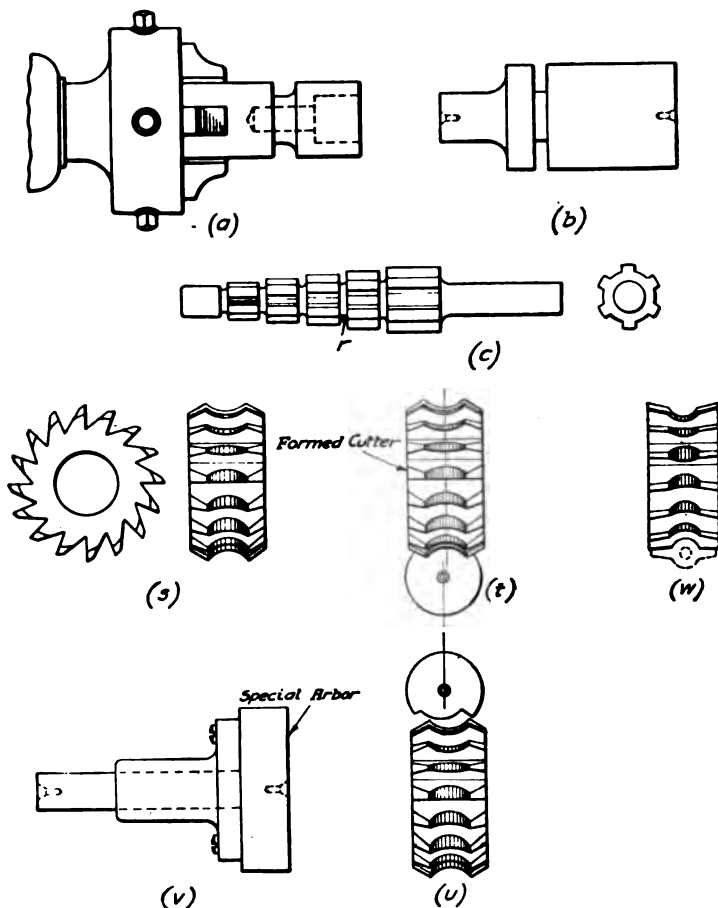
Broaches and Cutters Used in Making Fig. 15
